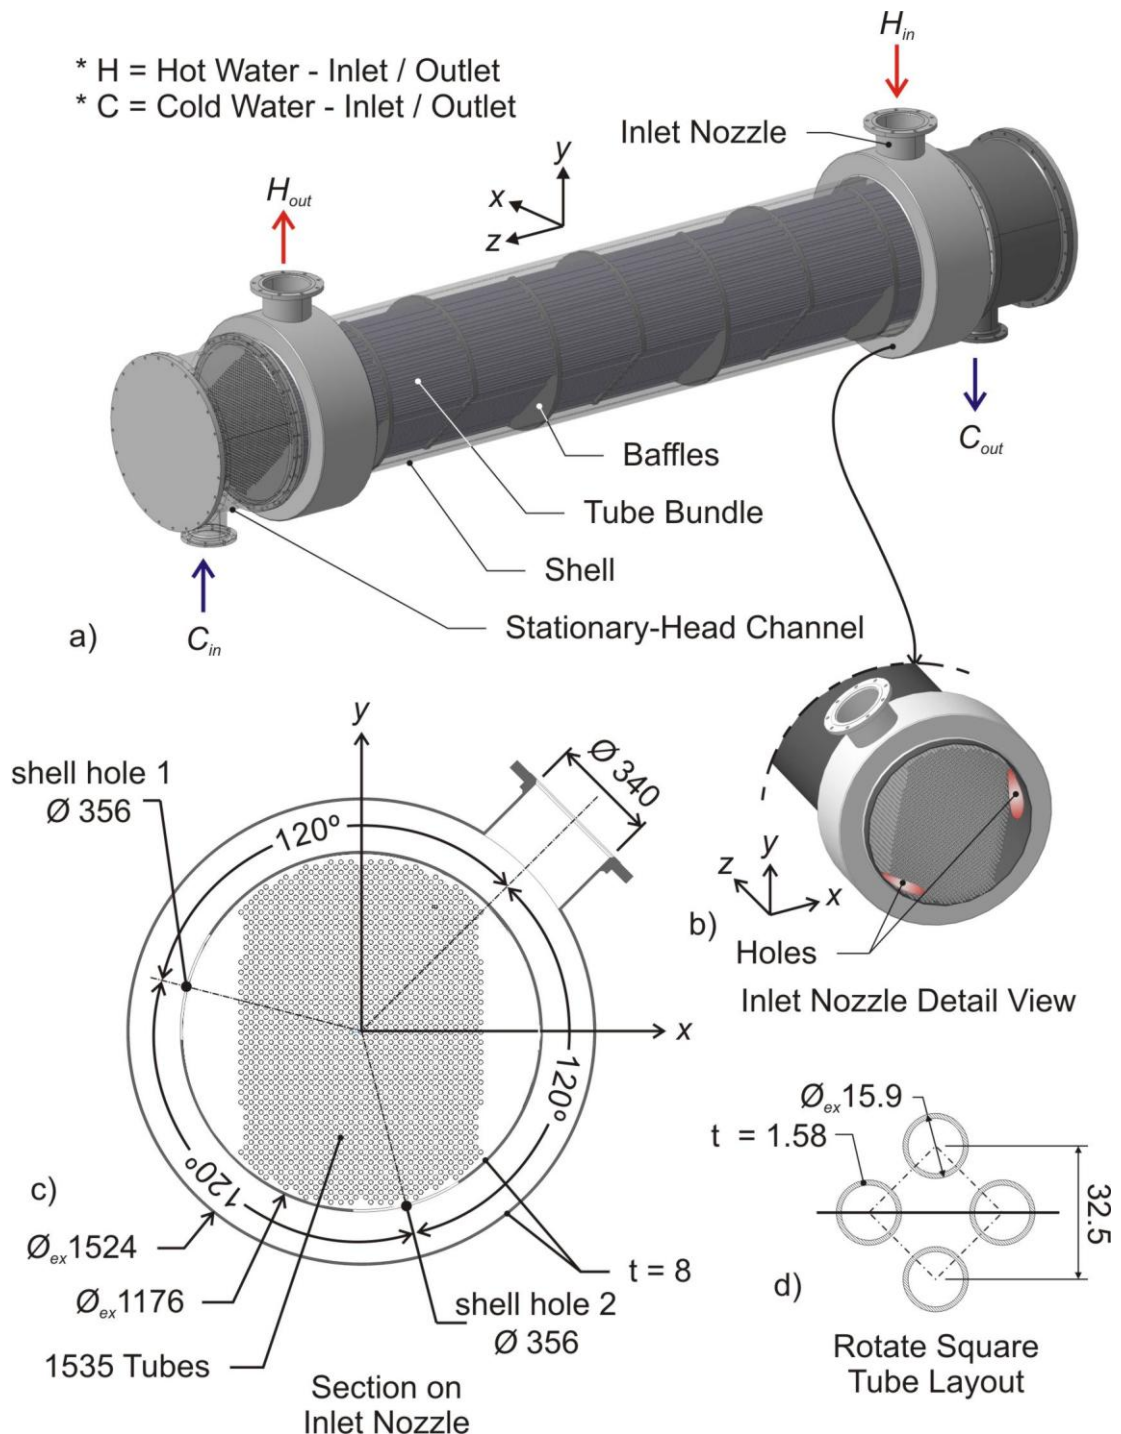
a) STHE general tridimensional view, b) Inlet nozzle detail view, c) Inlet Nozzle main geometry, position of the shell holes and main dimensions in millimeters, d) Tube bundle geometric characteristics in millimeters.
